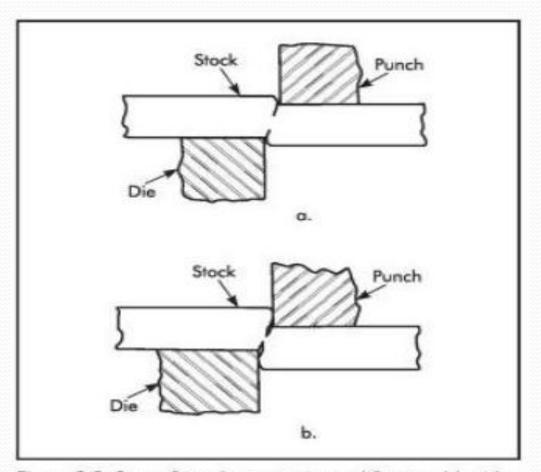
Start of punch penetration and fracture (a) with a relatively large punch-to-die clearance. The fracture paths (b) will meet evenly.
